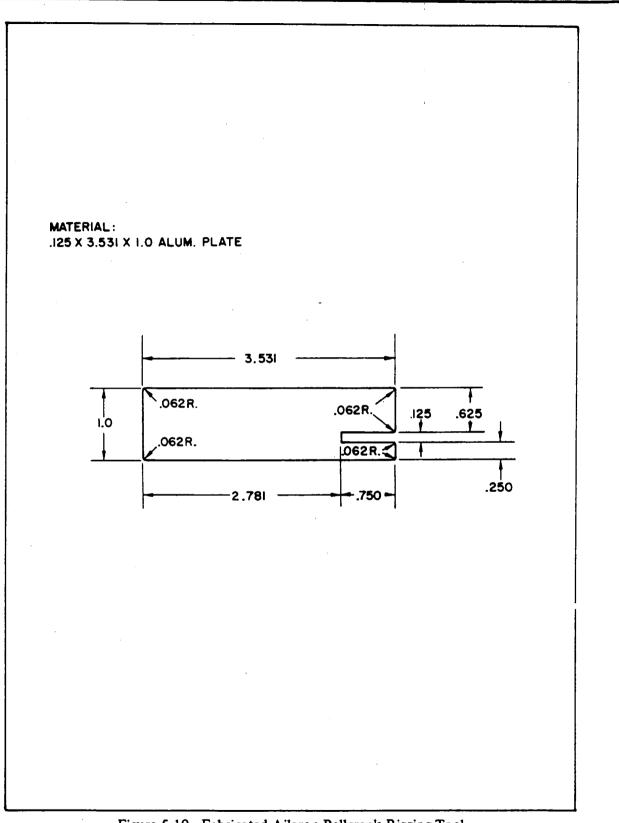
Fabricated Aileron Bellcrank Rigging Tool
